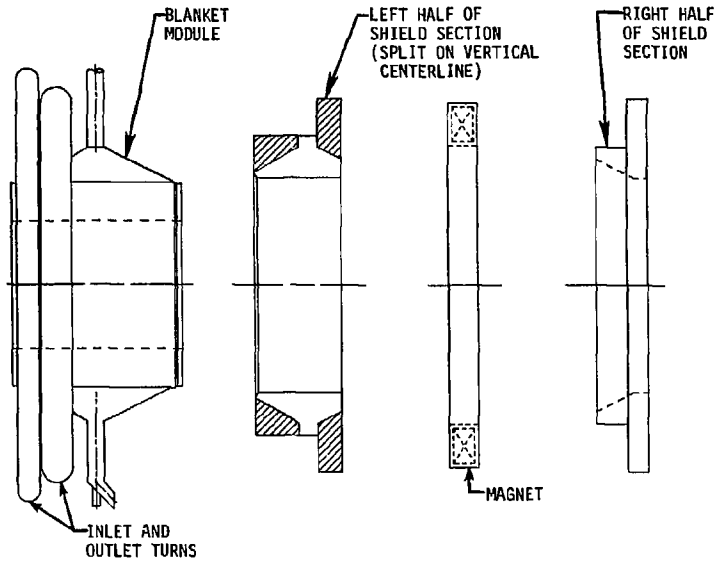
Blanket, magnet and shield components from the Fusion Breeder Reactor blanket module assembly showing the split shield arrangement.
